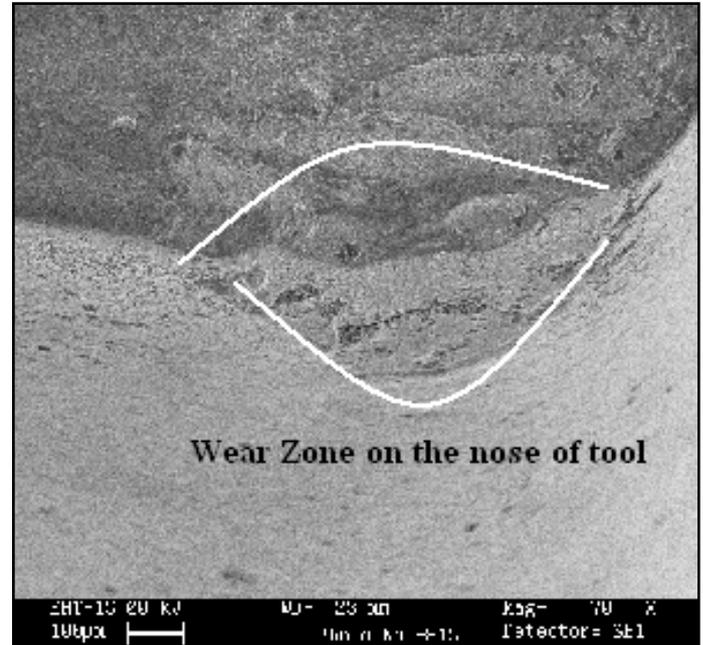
The Cutting Insert After 3minutes of Machining at  $v=70\text{m/min}$ ,  $f=.08\text{mm/rev}$  and  $W.H.=38\text{HRc}$ .
